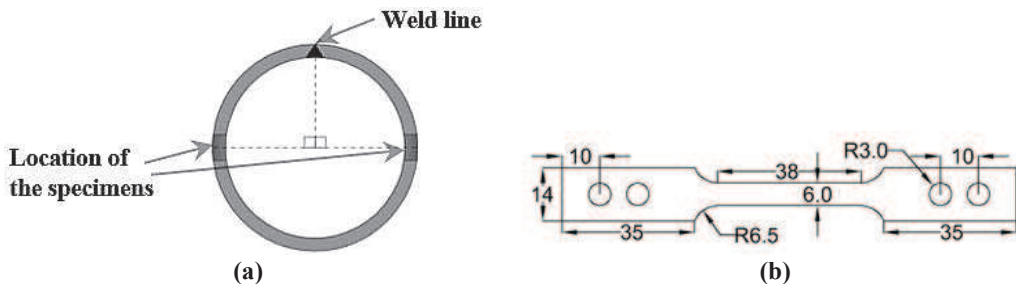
a) Tube section and b) dog-bone specimens (nominal dimensions in mm)
